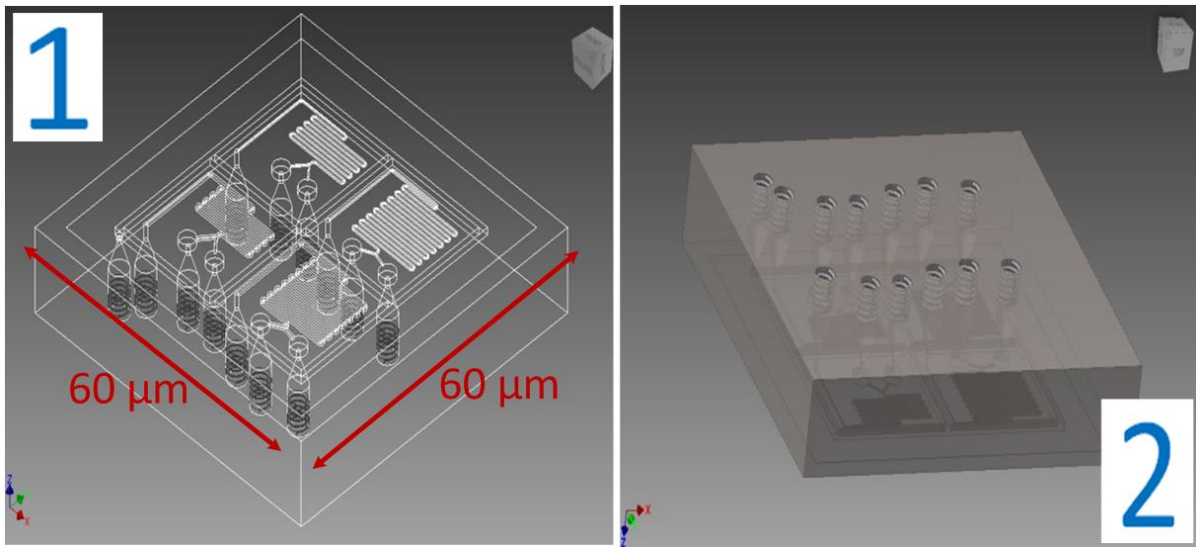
3D design of the device using Autodesk Inventor, 1) top view, 2) bottom view
